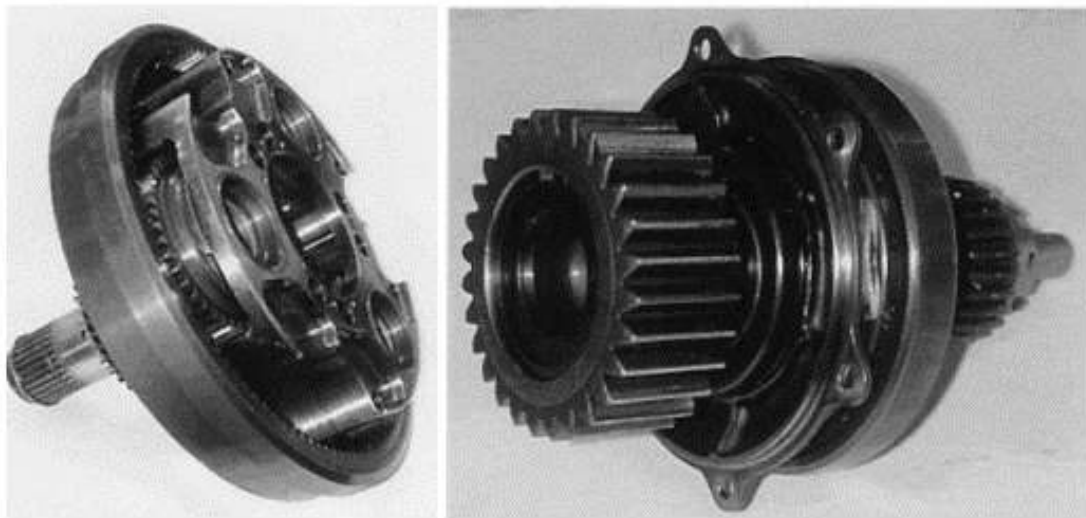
The first stage of TV7-117S turbo-prop motor gearbox a) carrier and ring gear assembly b) sun gear assembly [104]
